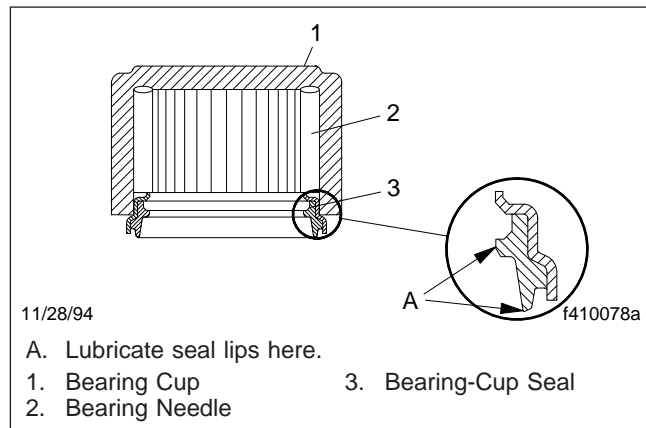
, Sectional View of a Half-Round End-Yoke U-Joint Bearing Cup
